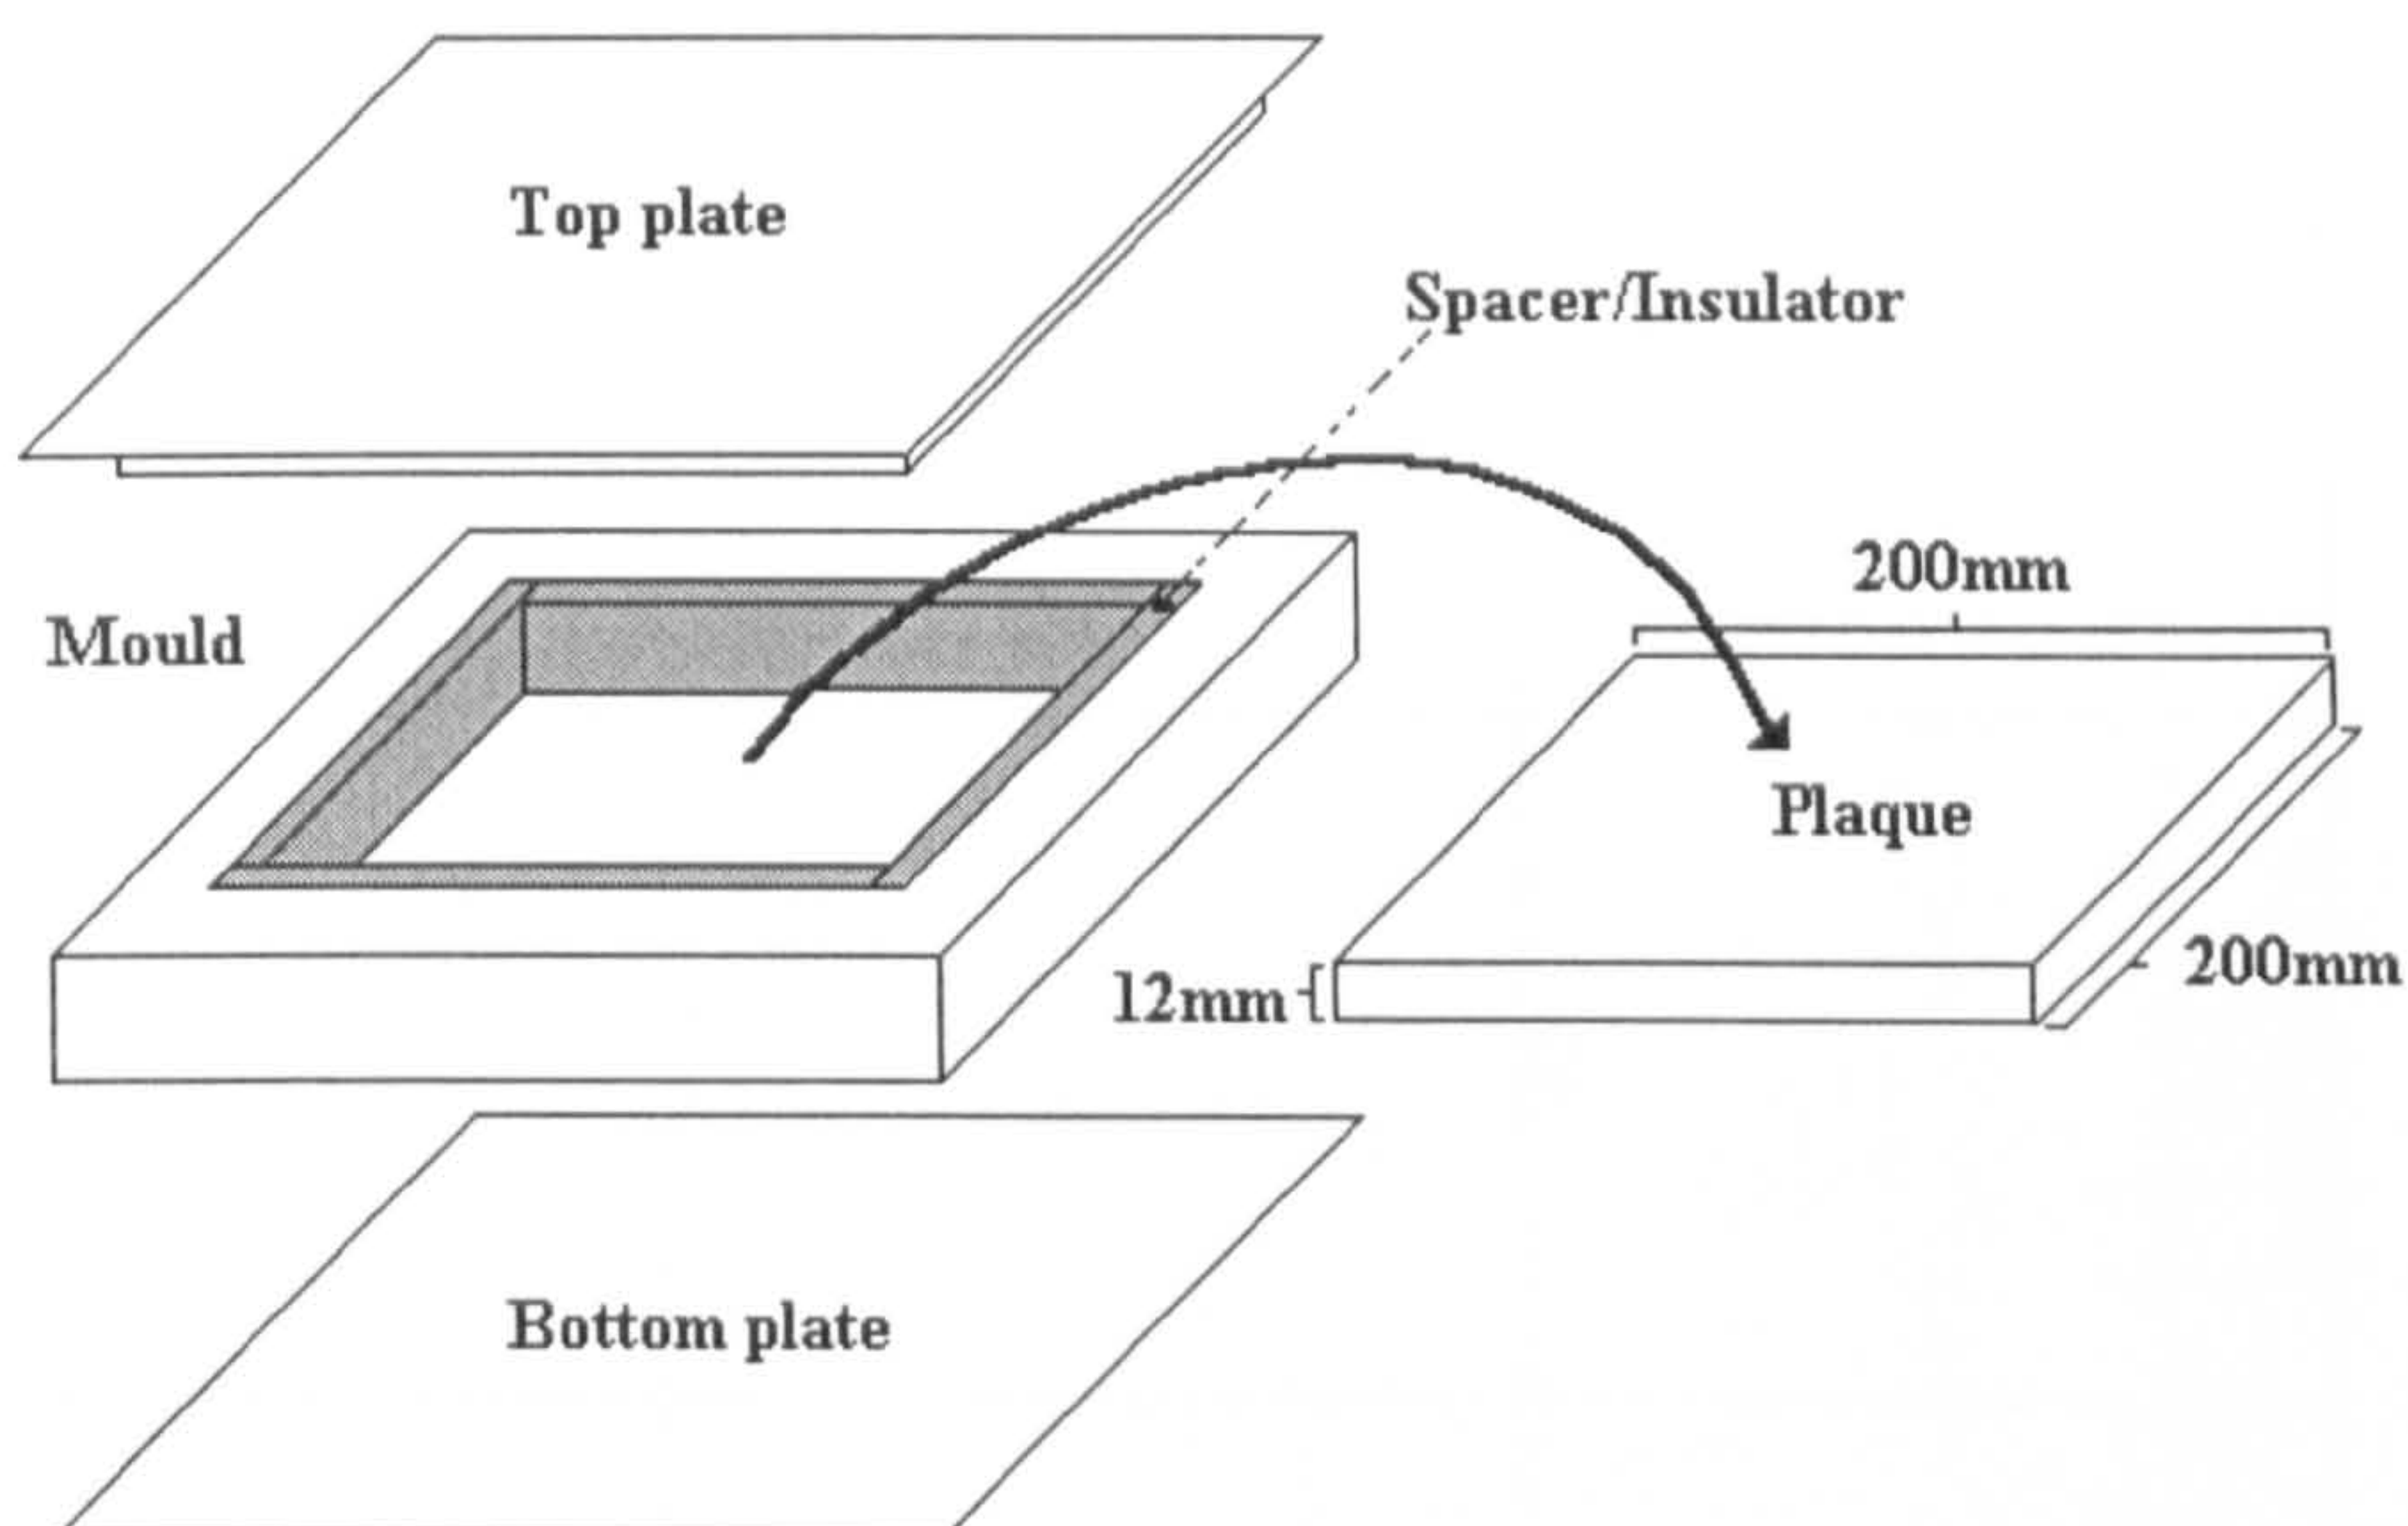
Schematic illustration of the mould used for the production of the PE compression moulded plaques.
